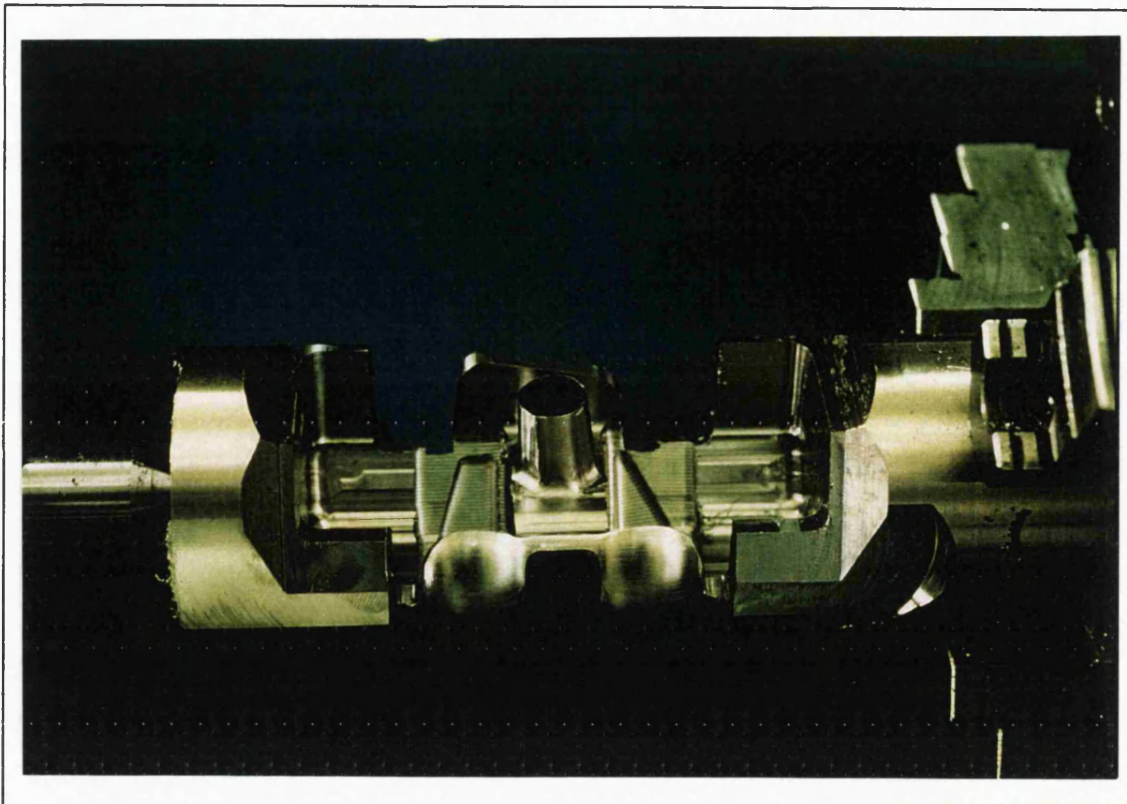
A superstabilised stainless-steel femoral component and casting waxes manufactured using a CNC machine and computer software developed to generate surface models of the prosthetic components.
